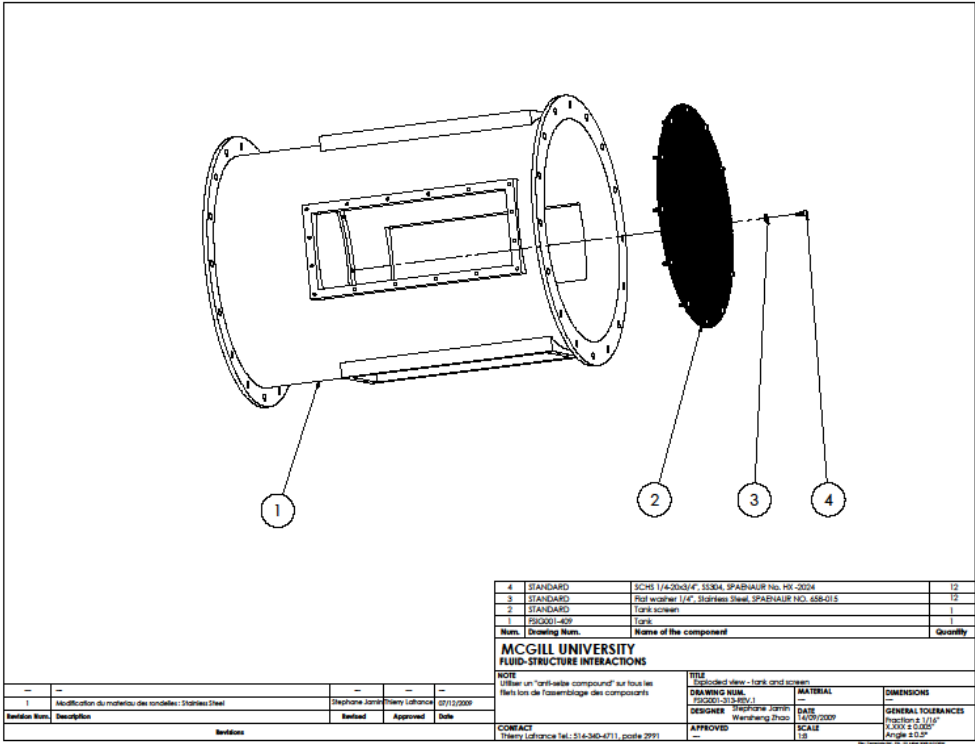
Sub-assembly drawing for the tank: Tank and screen
